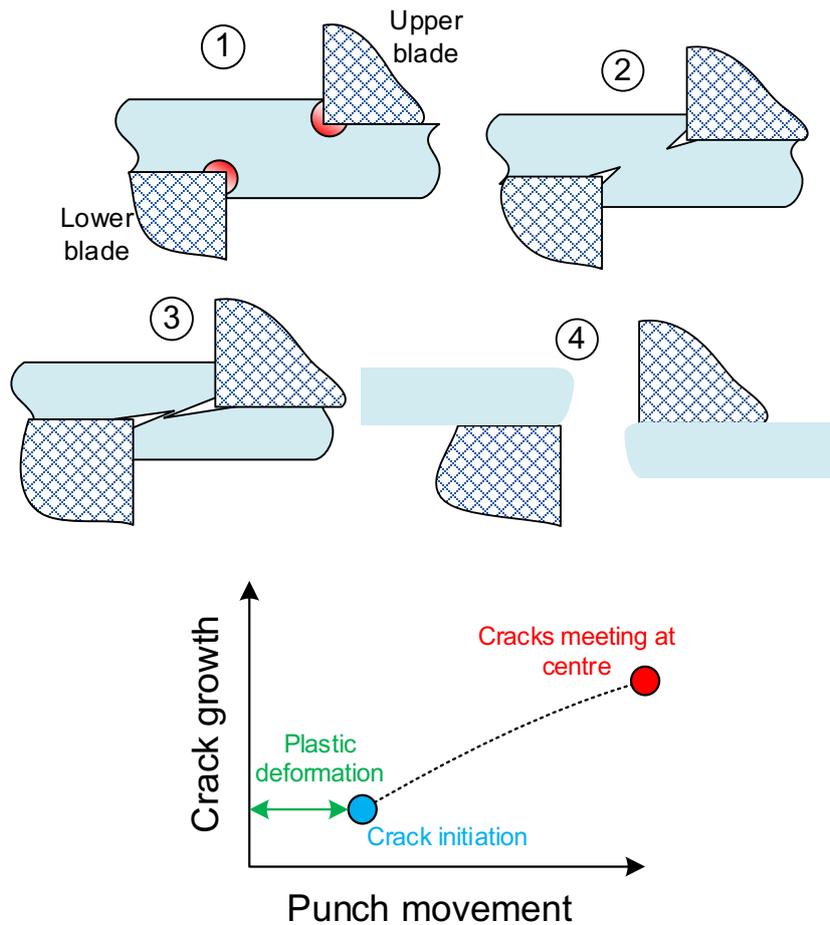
Schematic of sequential progress in shearing action resulting in cutting of sheet metal indirect extrusion process
